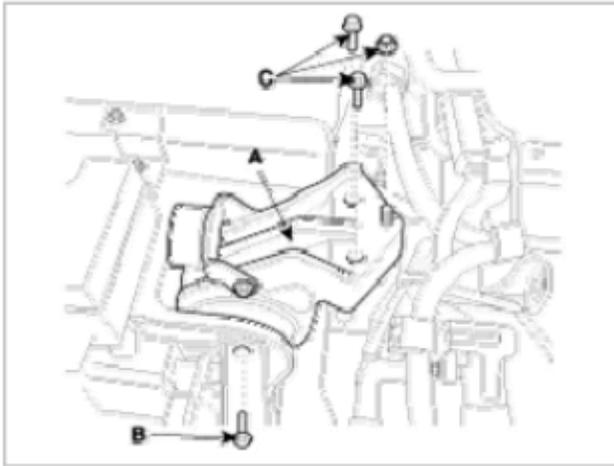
Locating Engine Mounting Bracket, Bolts And Nuts
